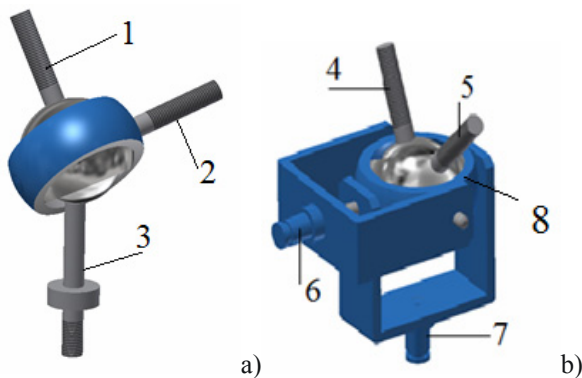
Multilink spherical joints: a) three link spherical joint; b) four link spherical joint.
